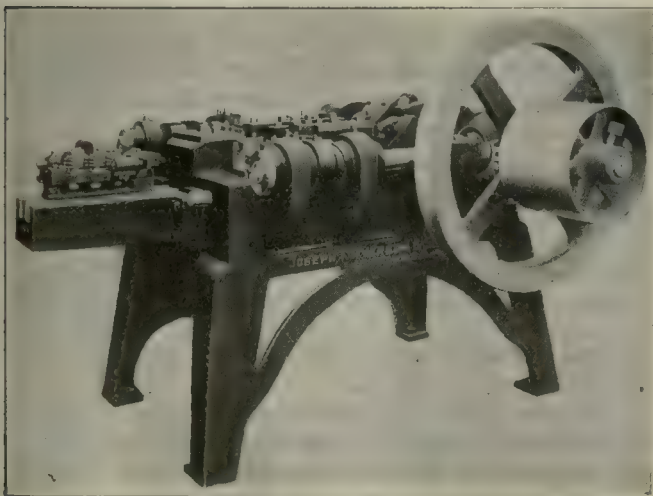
RYERSON-GLADER WIRE-NAIL MACHINE
